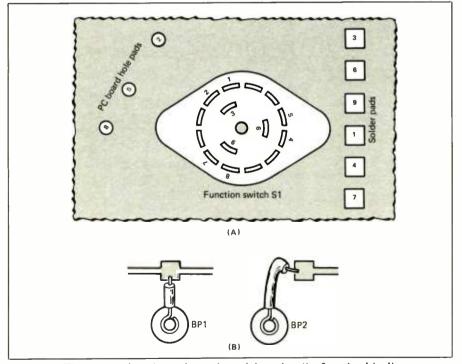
These two drawings show the wiring details for the binding posts and function switch.
